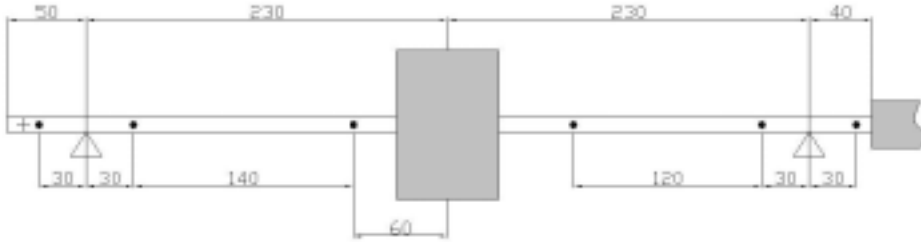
The actuating point is located at the centre of the bearing span. The triangles represent the journal bearings. The armature is located in the middle (shown in grey). The rotor shaft was driven at the right end through the flexible coupling also shown in grey. The displacements were measured at the black dots. The point next to the armature was used in the open-loop measurements and active control.
